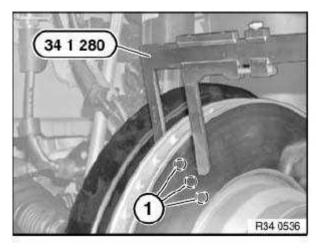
Identifying Special Tool (34 1 280) Courtesy of BMW OF NORTH AMERICA, INC.
